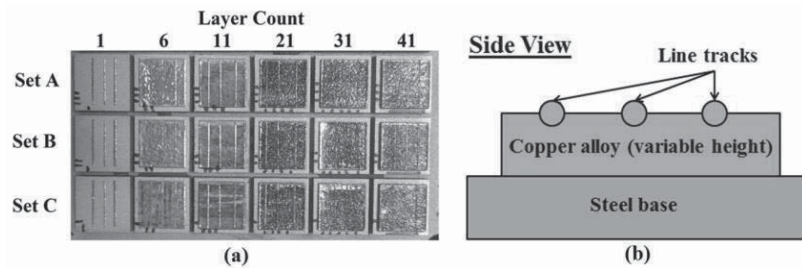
(a) Top view of printed samples, (b) Illustration of the front view of specimen
